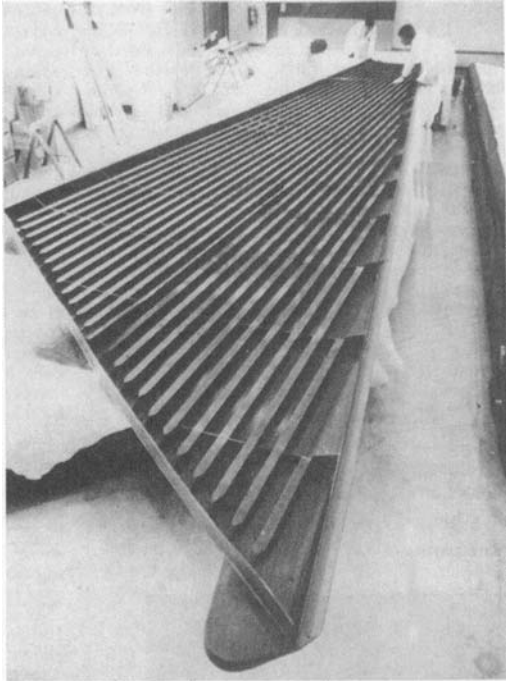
Airbus A310-300 Composite Fin In Final Assembly
